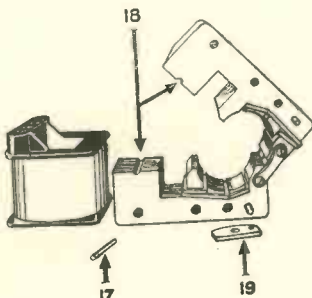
THE MAGNET UNIT OF THE 330 MOTOR.
